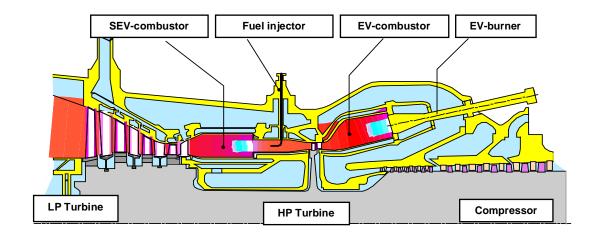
Basic drawing of Alstom GT24/26 (source: Alstom)
